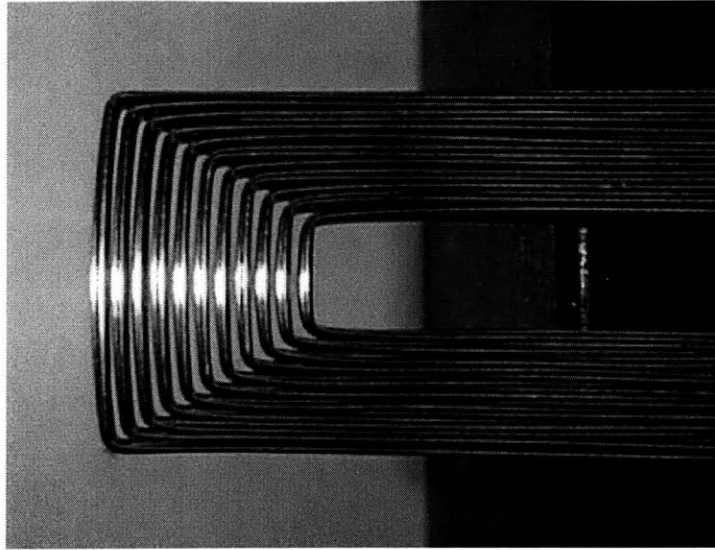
A separated end-turn coil allows each layer of the coil to be directly cooled [41]. This technique could be used in future generations of motors for the z - θ axis.
